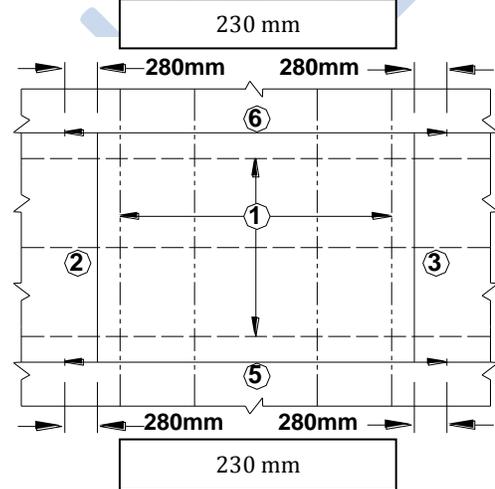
Typical Welding Sequence for Butt & Seams / Frames Attached
